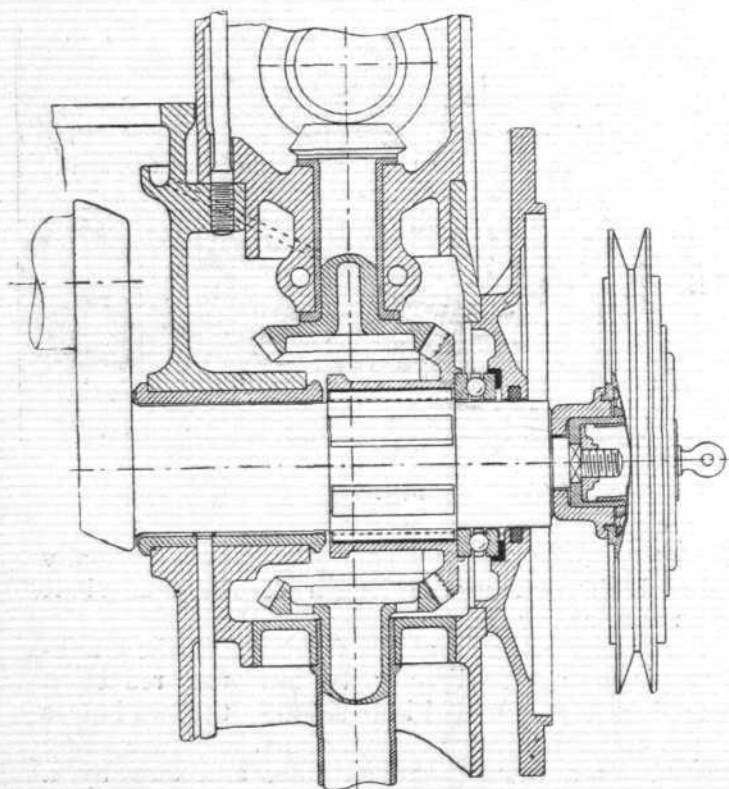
Arrangement of floating bevel gear and wireless clutch-pulley on rear end of crankshaft.
